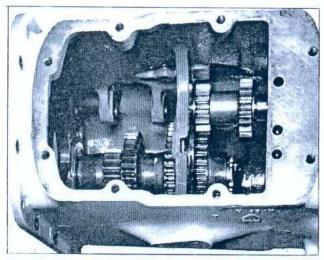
Countershaft Gear and Reverse Idler Properly Installed
